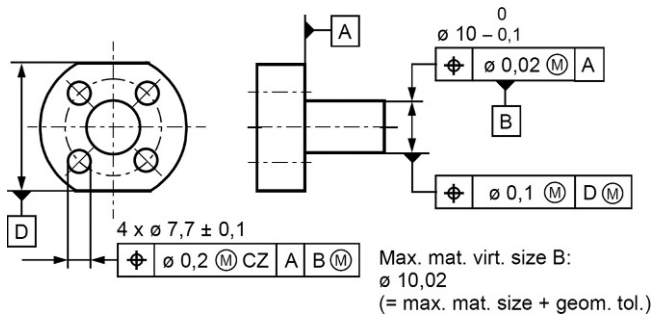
Maximum material virtual size of datum B; perpendicularity tolerance to be regarded, symmetry tolerance 0,1 to be disregarded for B \textcircled{M}
